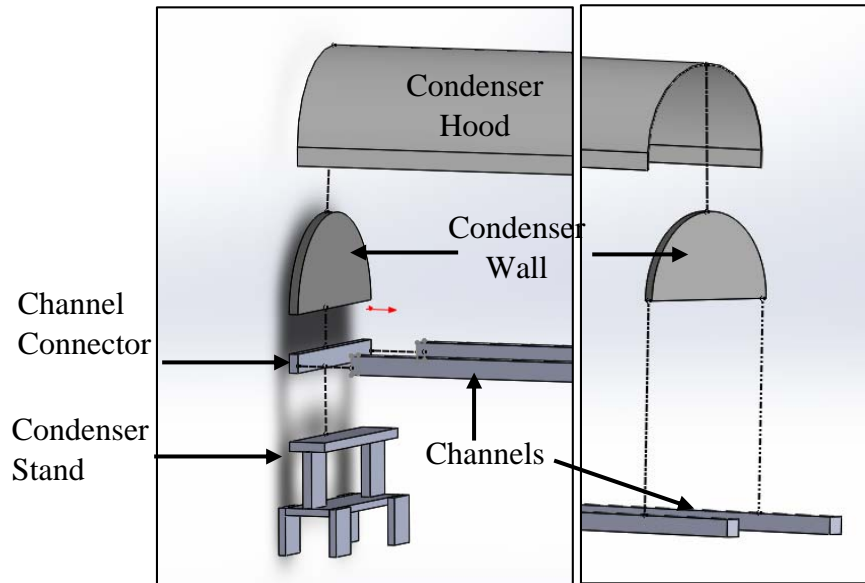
Exploded view of each end of the condenser. The dotted lines shows the location of the welds.
